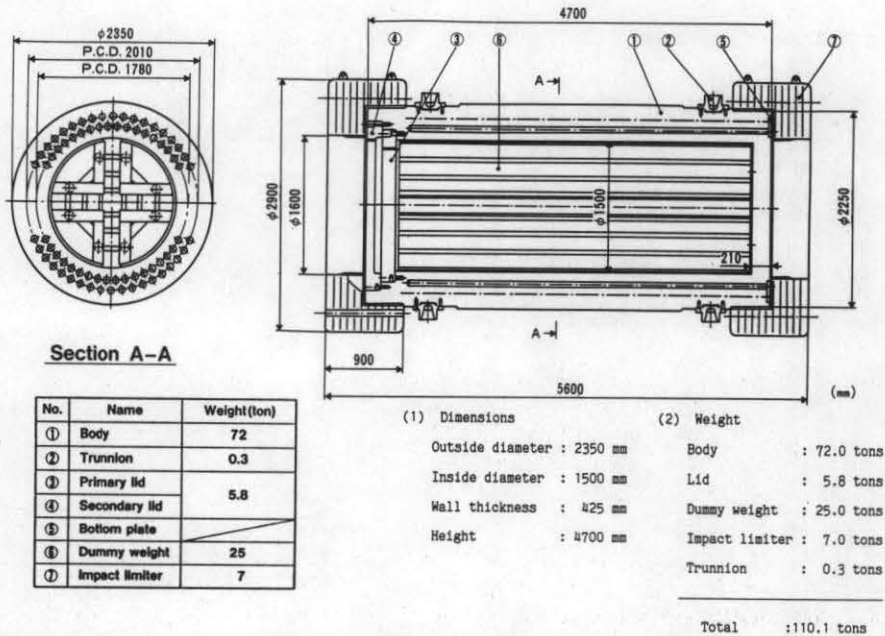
Sectional View of DCI Cask Test Body (Unit : mm)
